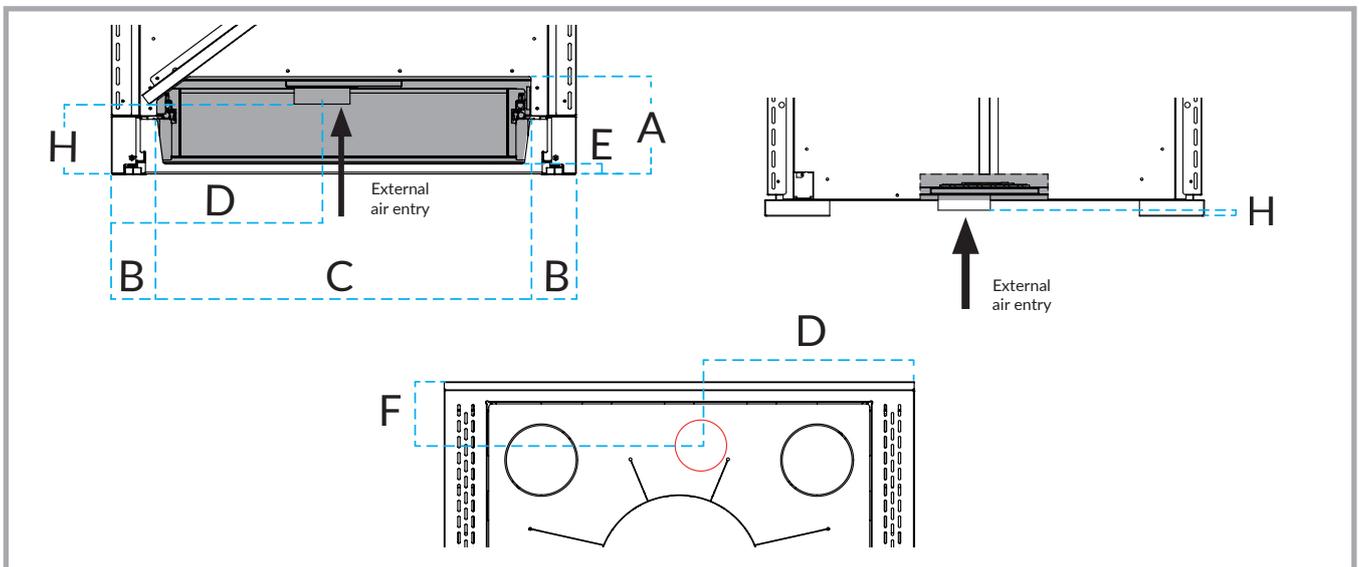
Installation with air intake in the room of installation and installation with air intake directly connected to the wood fired cooker.
